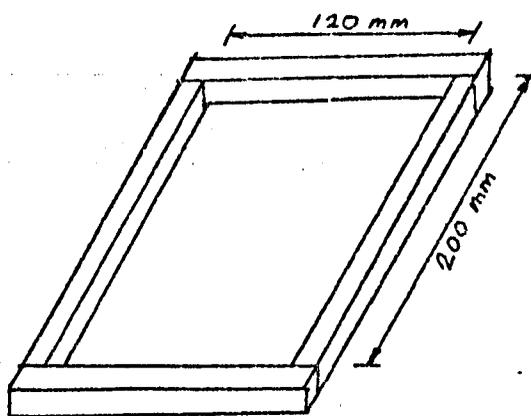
Diagram of glass plates used for casting films and sheets
